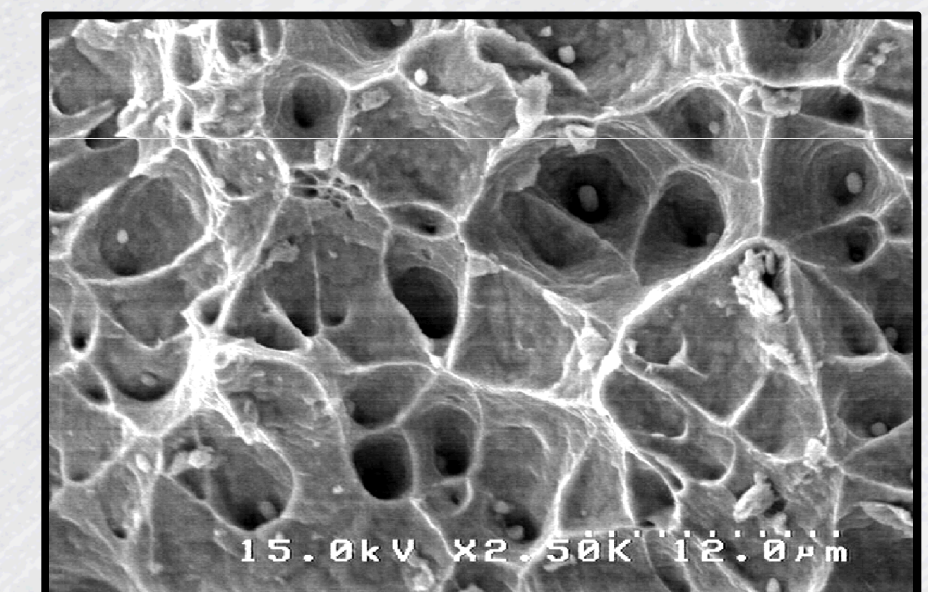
Fracture surface of stainless steel 304L. Inclusions can be seen at the center of the large voids which have coalesced.
